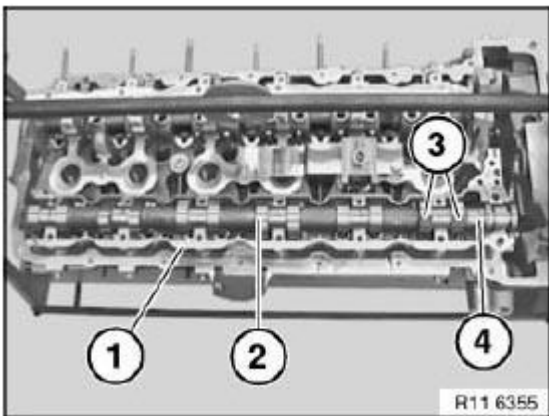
Identifying Lower Bearing Bank, Exhaust Camshaft And Cam
